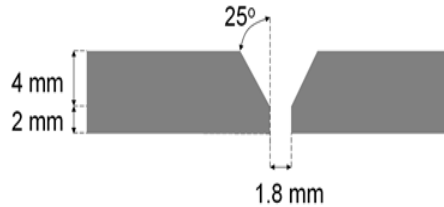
The Y-groove joint design used during welding of 6 mm thick AH36 steel.
